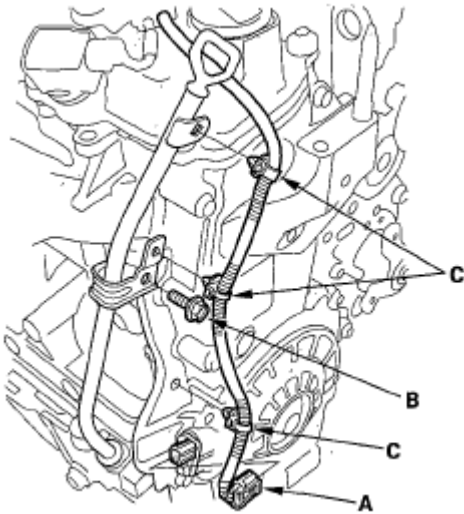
Locating Crankshaft Position Sensor Connector, Dipstick Tube Mounting Bolt & Harness Clamps
